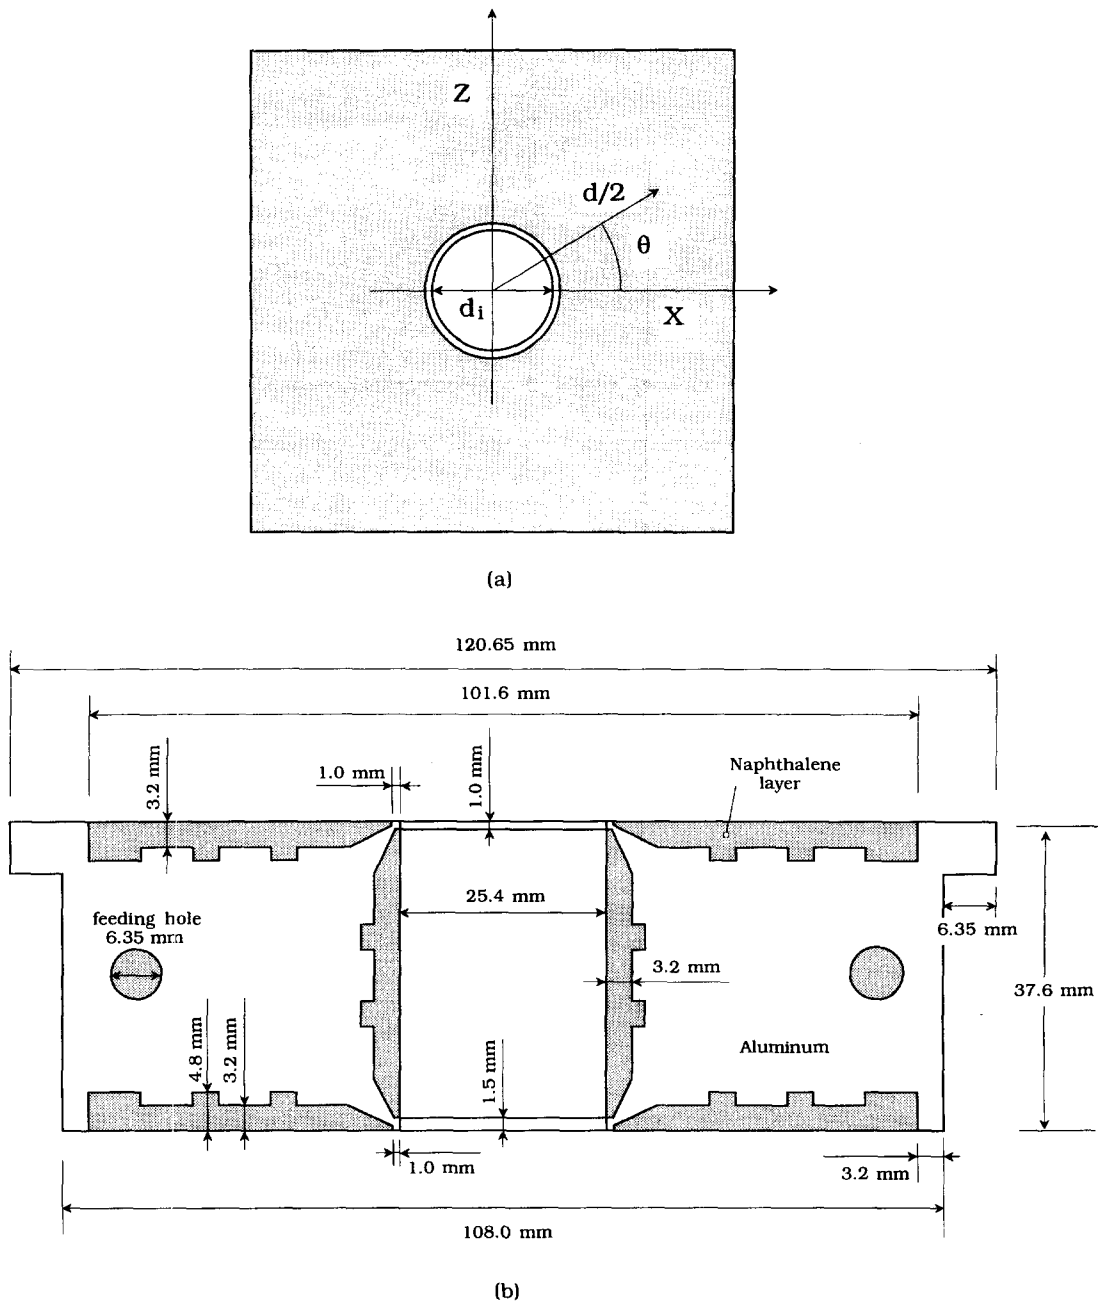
Test plate for the inside hole measurements: (a) coordinate system; (b) cross-sectional view.
